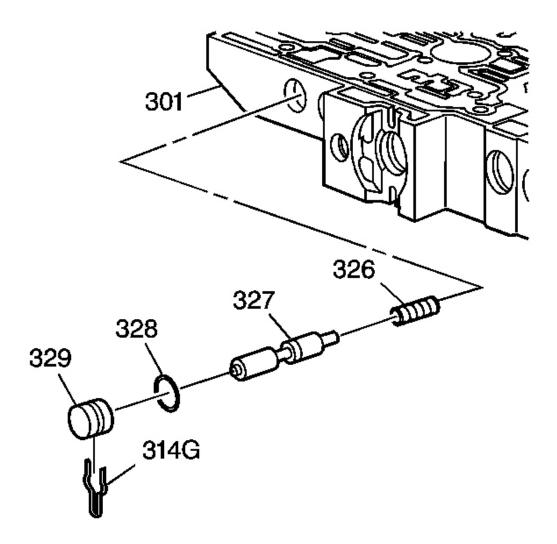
View Of 2-3 Shift Solenoid & O-Ring Courtesy of GENERAL MOTORS CORP.
